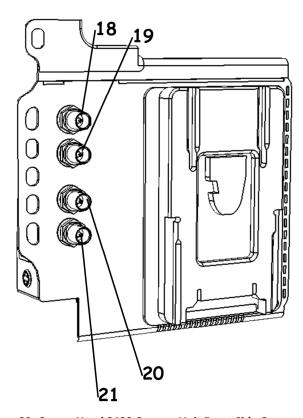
CopperHead 3400 Camera Unit Front Side Connections
